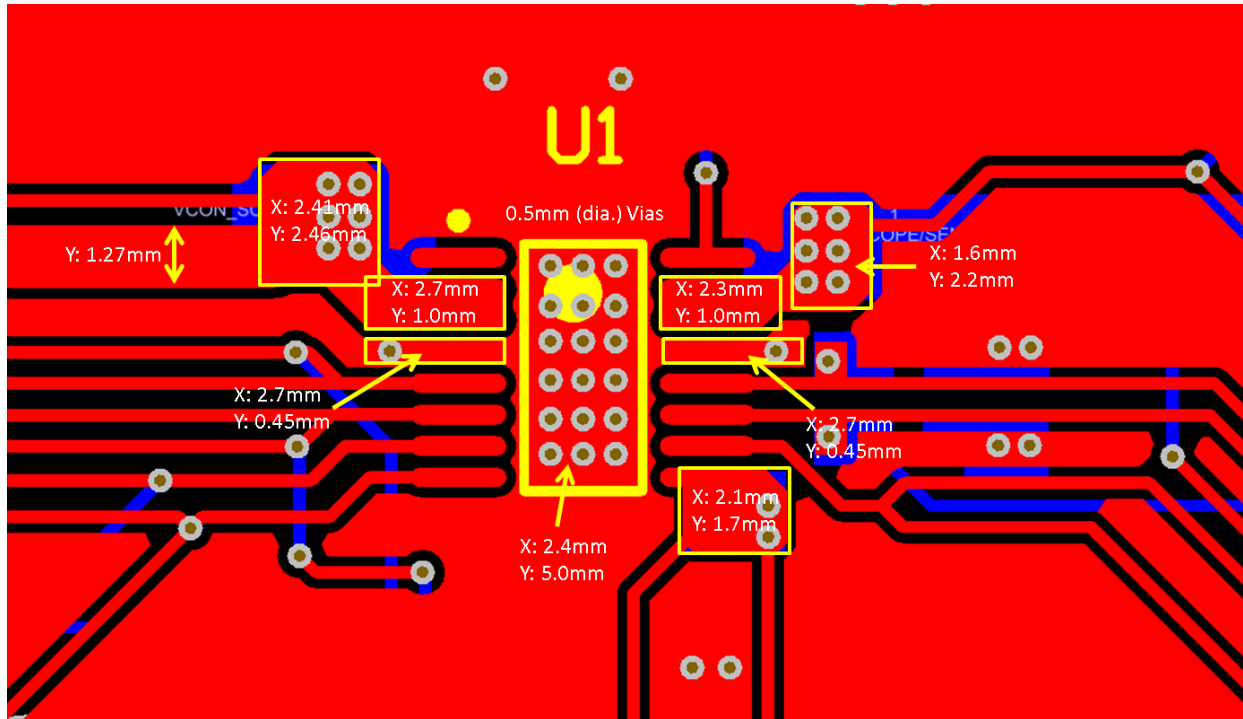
Thermally Optimized PCB Layout Top Layer
